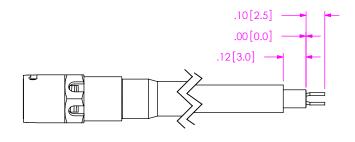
(C28T-XX.XX-SPSX-100012 SHOWN)
